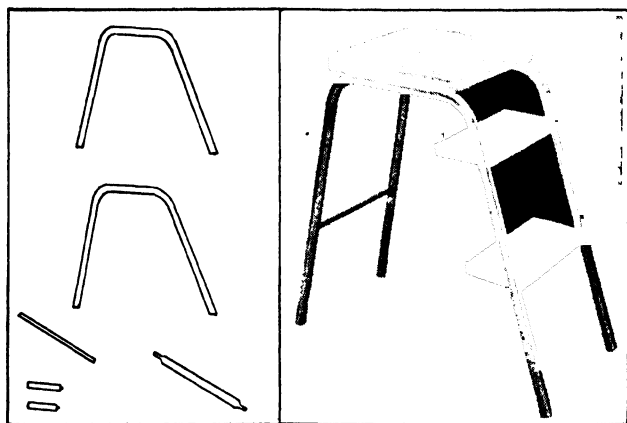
, (left). Parts for stool. Fig. 15, (right). The arc welded stool.
